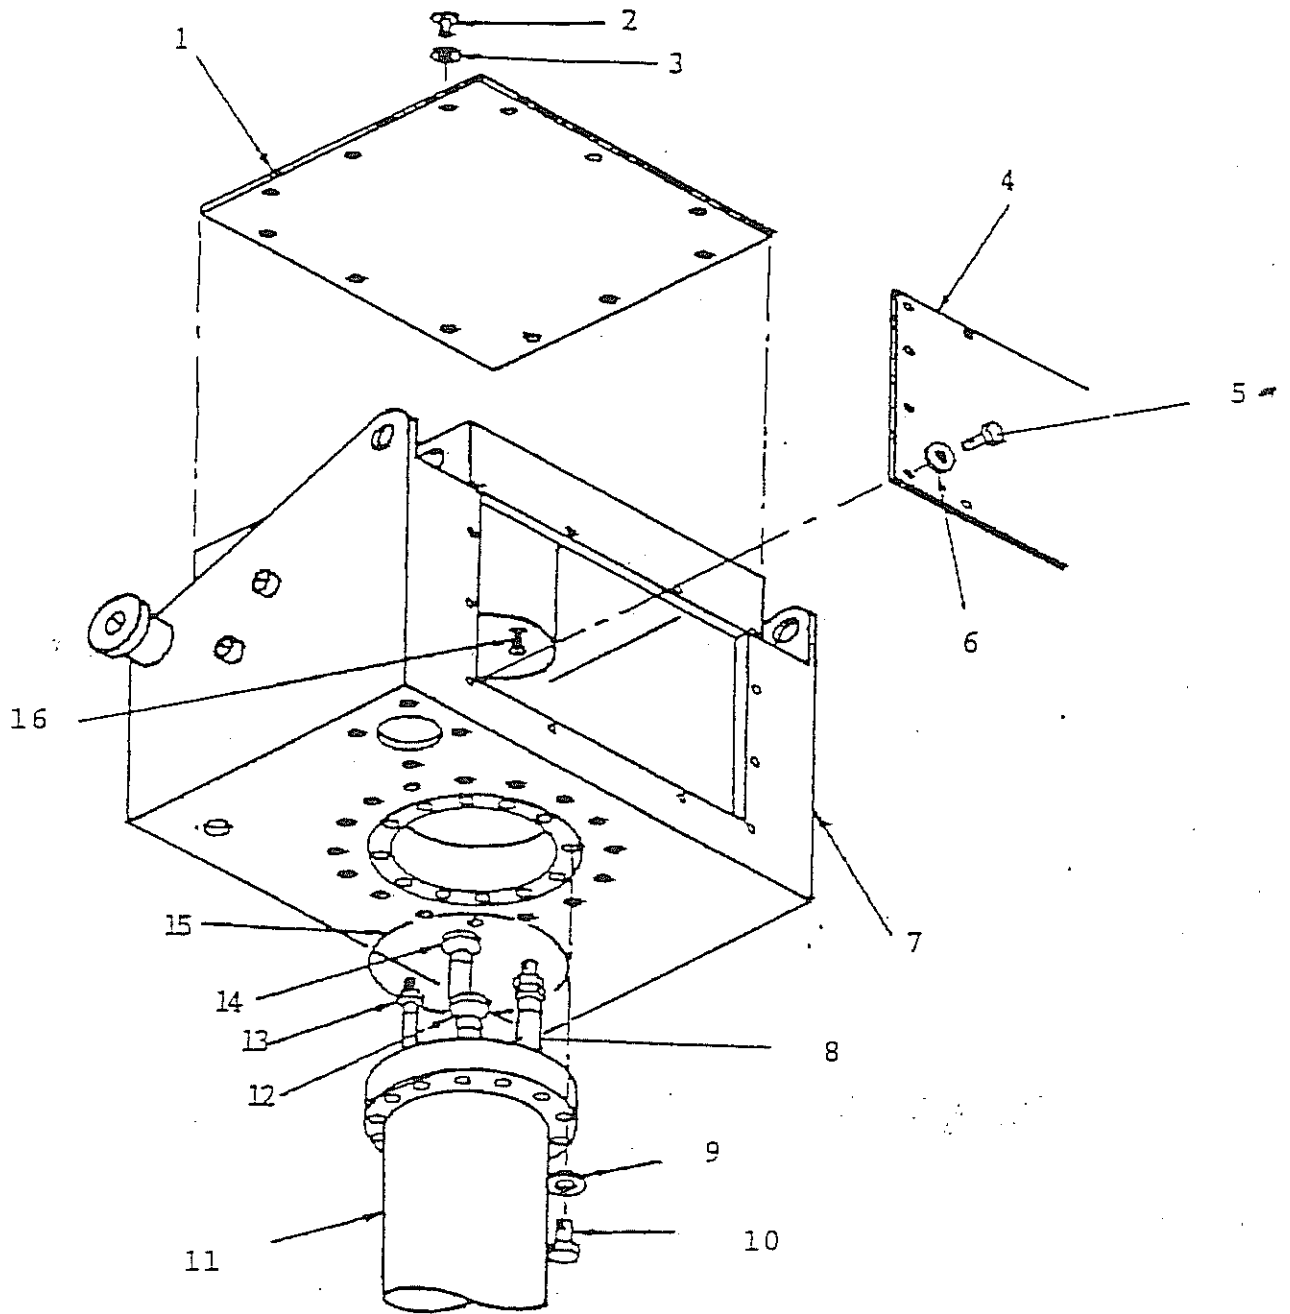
(1 of 3). Upper Outdrive Housing Assembly
